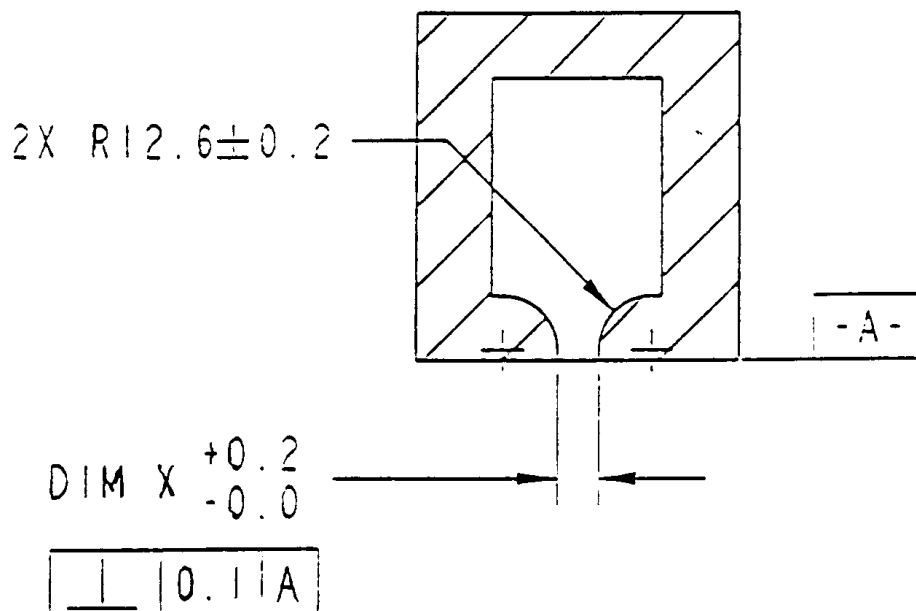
CRITICAL DIMENSIONS FOR GRIPS
